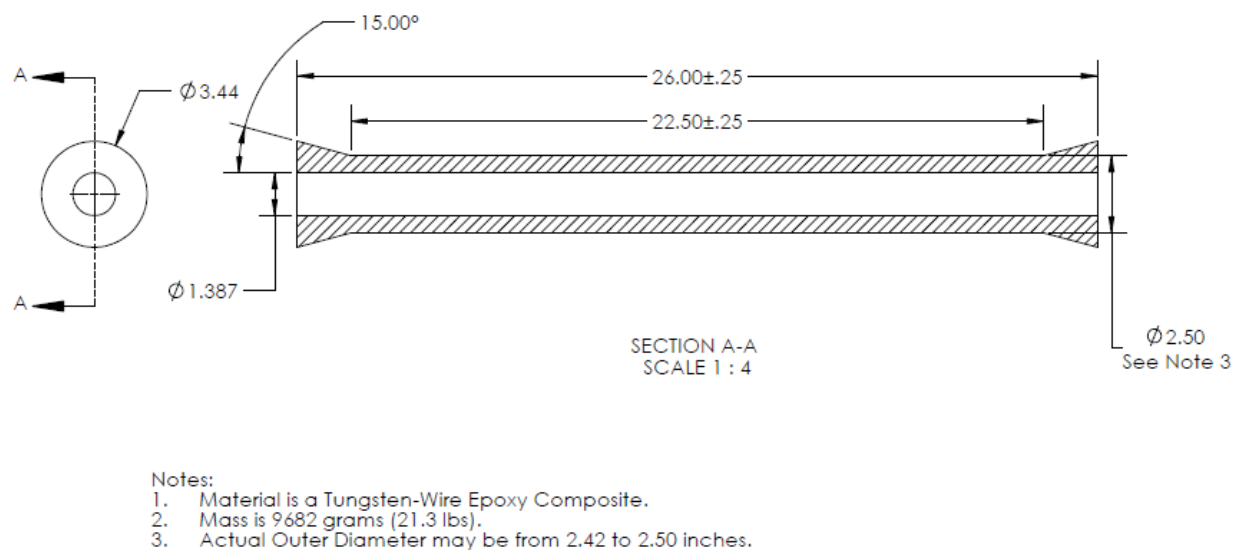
Drawing of the tungsten-wire/epoxy flex-bend test specimen.
